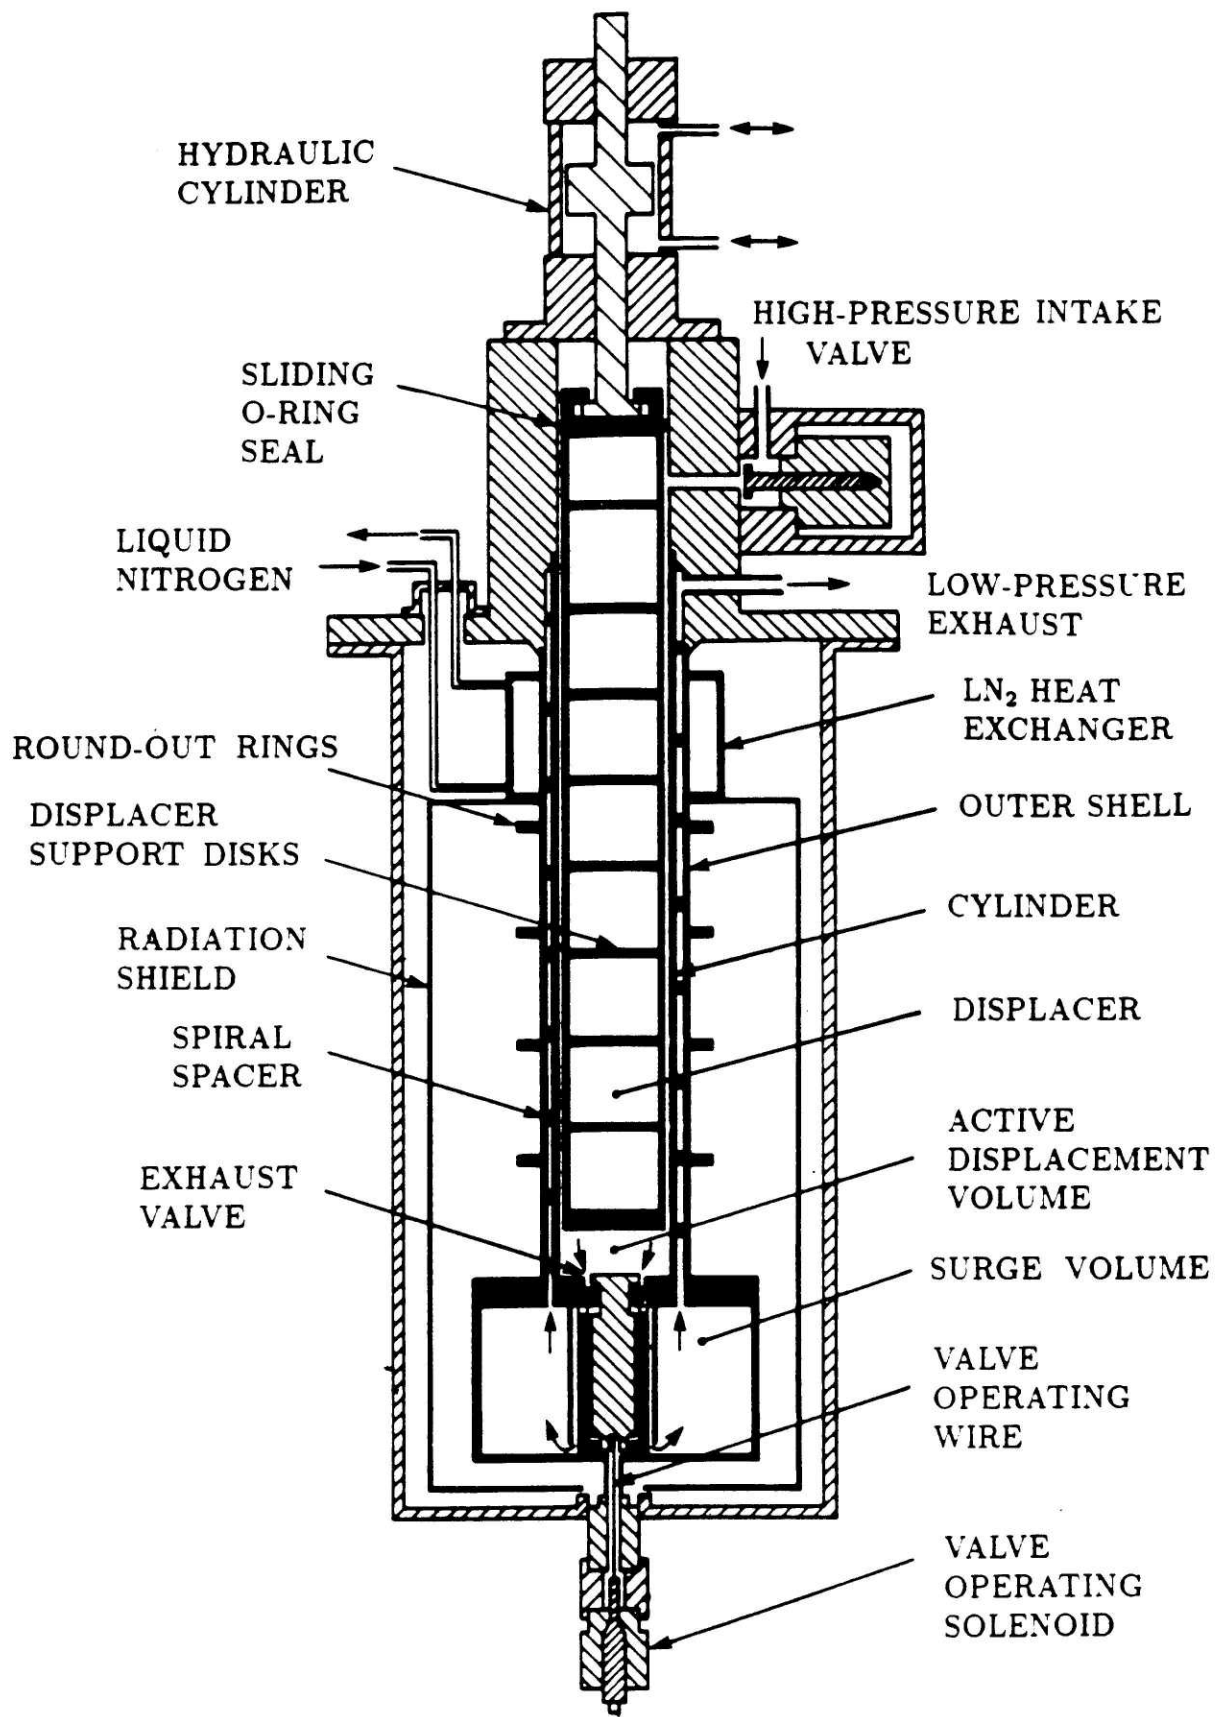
Schematic of integral heat exchanger and expansion engine.
